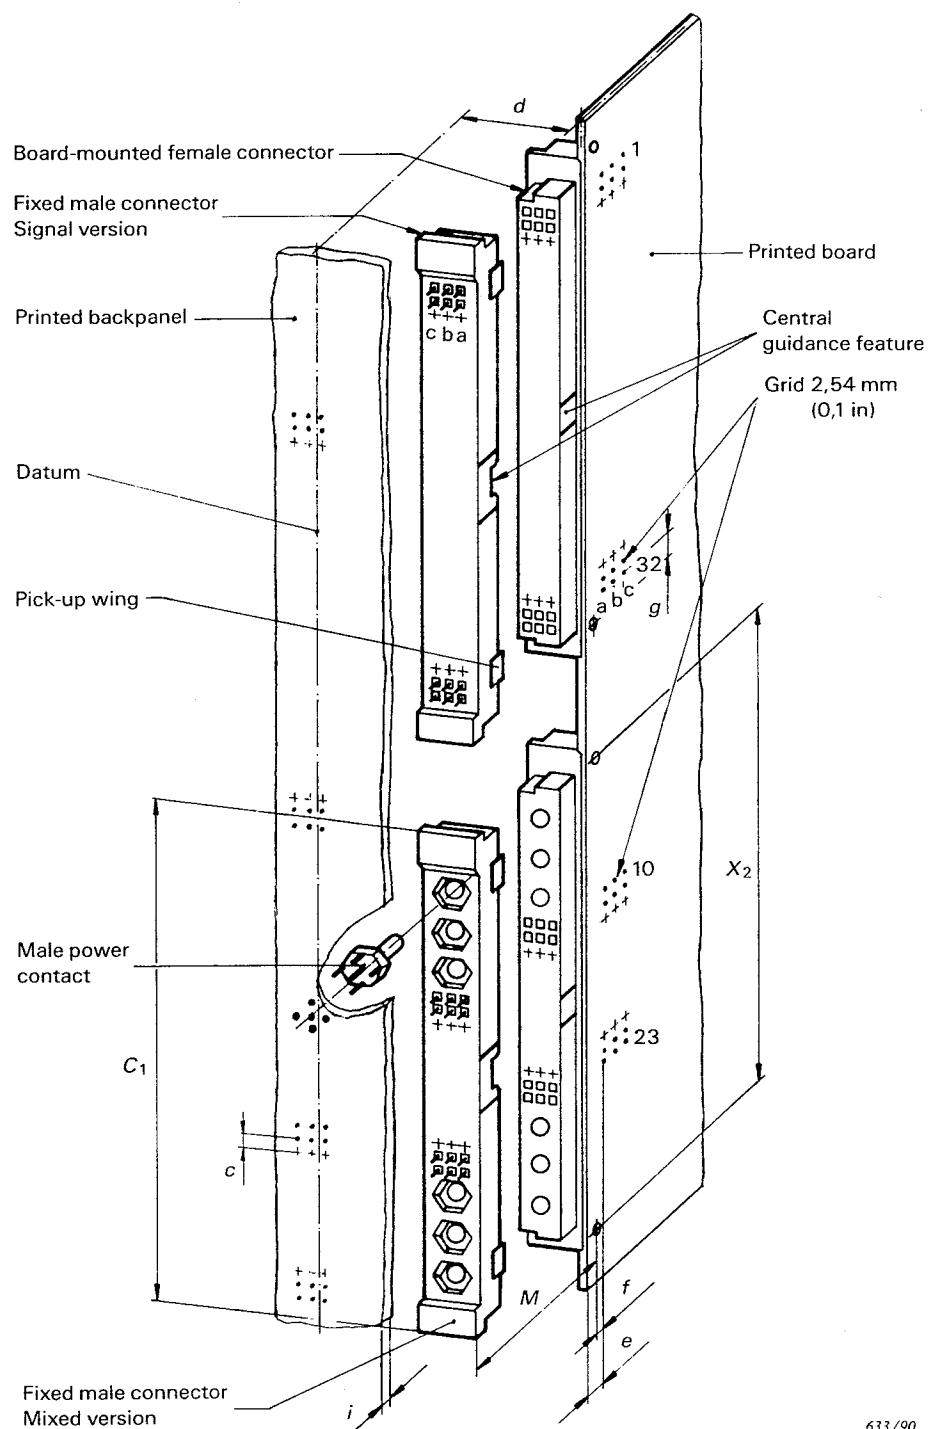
Isometric view and basic dimensions for connector system, range 2
